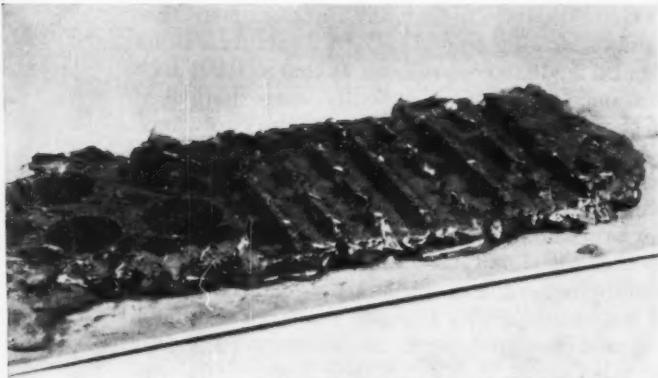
After filling these core cells with a mixture of iron powder and sodium silicate, cuts were made with a staggered-tooth side mill. Some breakout of the filler is evident.
